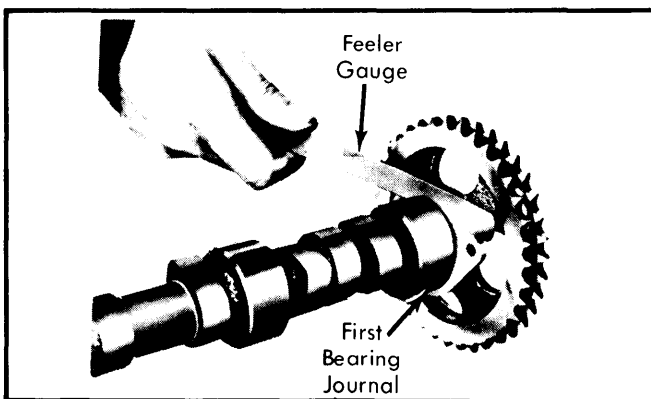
Measure Camshaft Thrust Clearance with Camshaft Sprocket Installed
